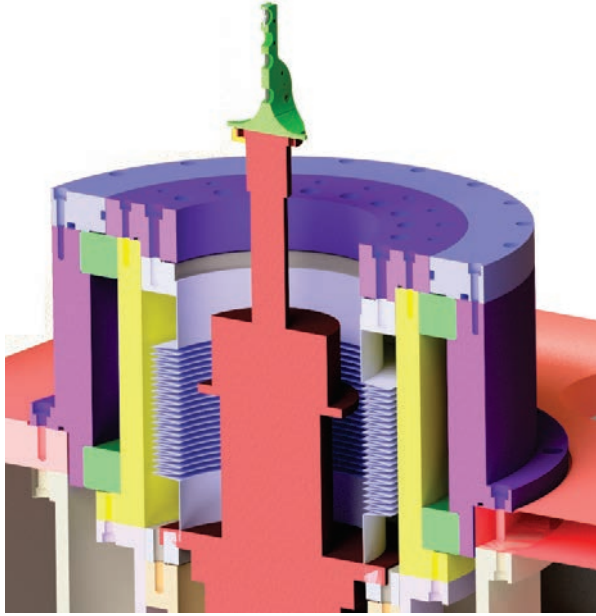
Simplified section of the target holder on the top of the cold head of the cryo-cooler.
